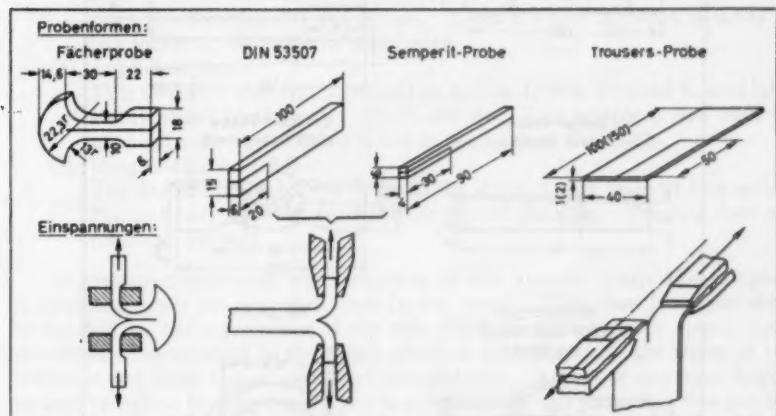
Tear strength testpieces for which tear propagation speed is dependent on jaw speed. (On the sketch): Probenformen = Testpiece shapes. Fächerprobe = Fan testpiece. Semperit-Probe = Semperit testpiece. Trousers-Probe = Trousers testpiece. Einspannungen = Methods of clamping.
